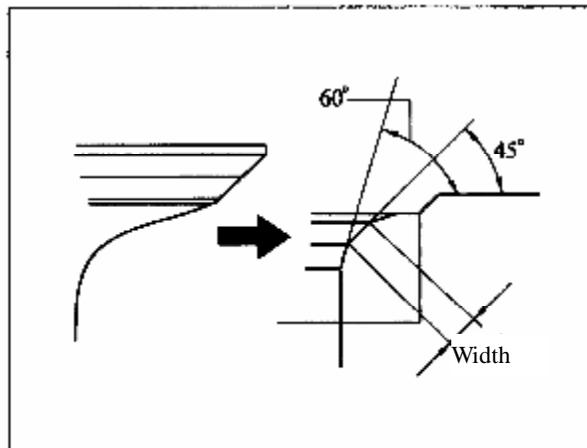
Grinding the Valve Seat with 45° and 60° Mill
